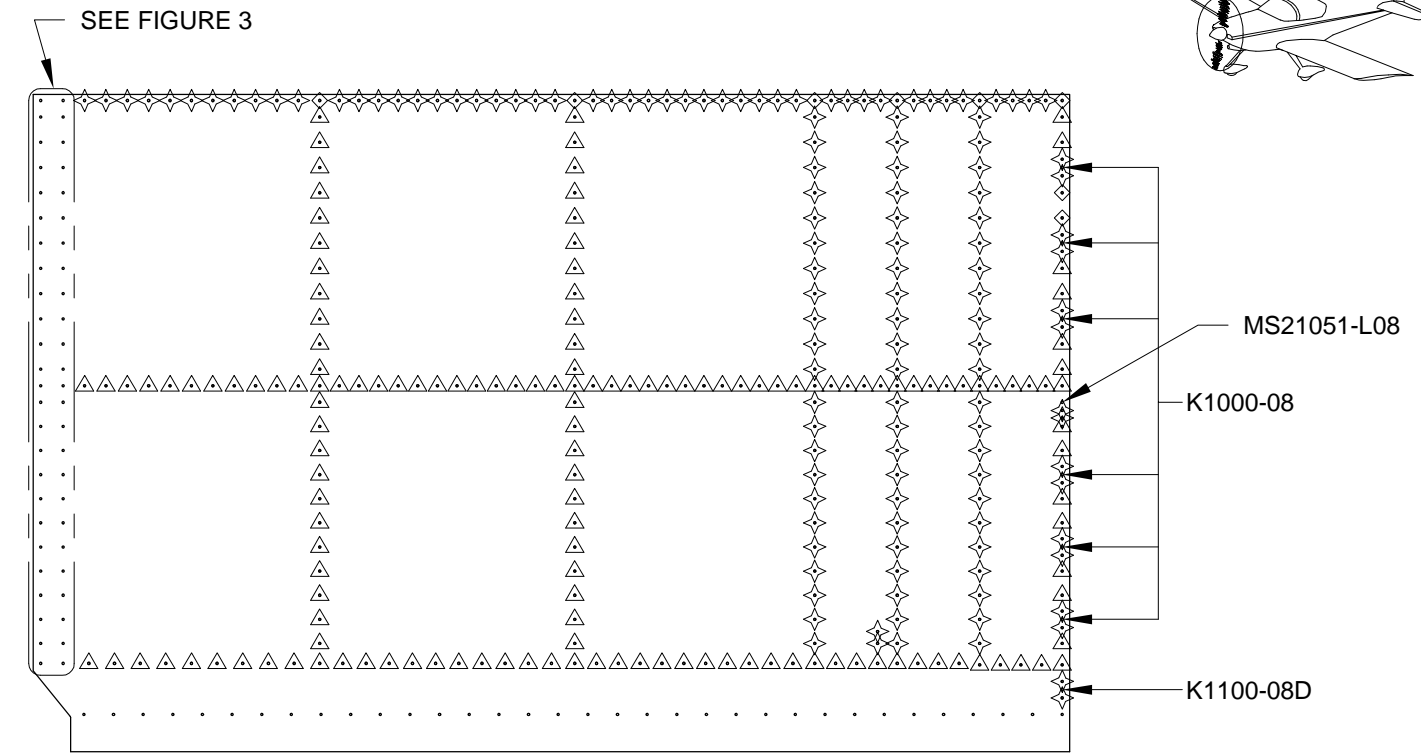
W-00002 TOP INBD WING SKIN RIVET CALL-OUT
